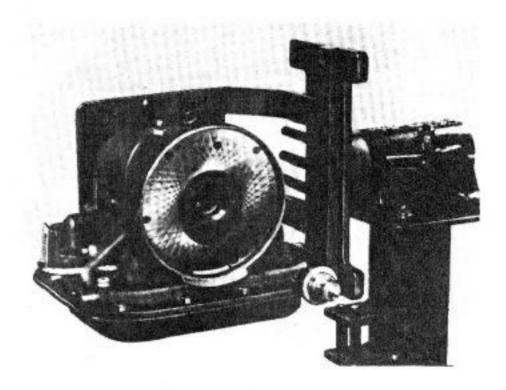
Bearing flange for planetary gearset. Transmission case is held on a repair stand.
